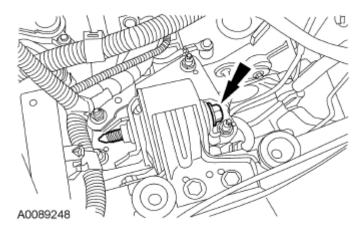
Locating LH Transaxle Mount Bolt Courtesy of FORD MOTOR CO.
